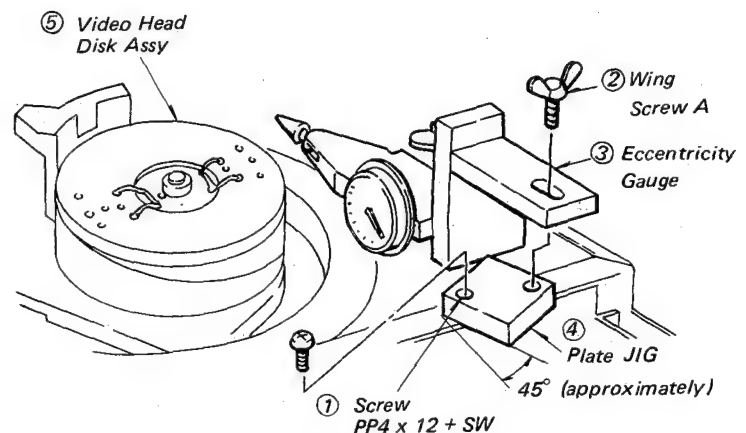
Cylinder Eccentricity Gauge Installation (2).
